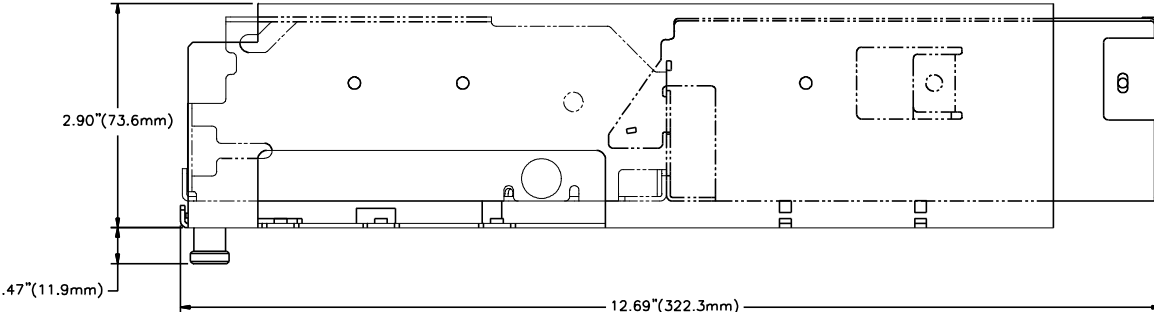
Model 750 Printer: Ticket Supply Box, & Drawer Chassis (65mm x 156mm)
